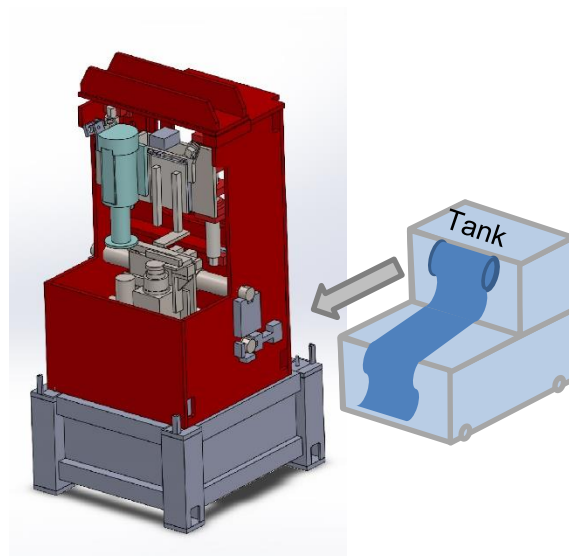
Hahn grinding machine tool on stand and the coolant tank.
